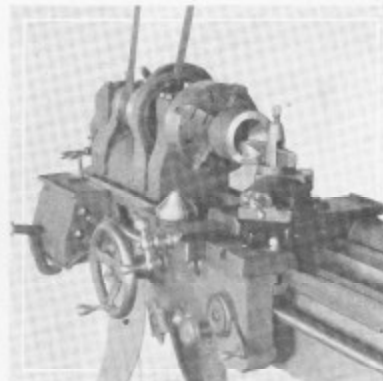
Boring a Tapered Die held in the Lathe Chuck, using the Compound Rest to Determine Degree of Taper
